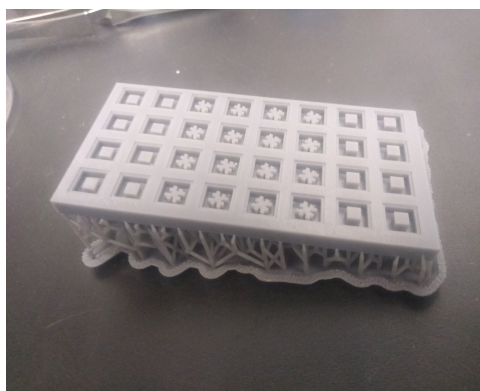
SLA 3D printed mold for PDMS damper geometry definition
